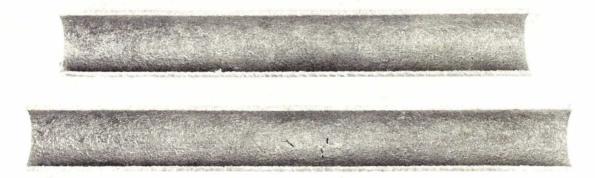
Inside surfaces of failed tube. Note pitting and perforation by branching crack in lower section. (approx. full size)
